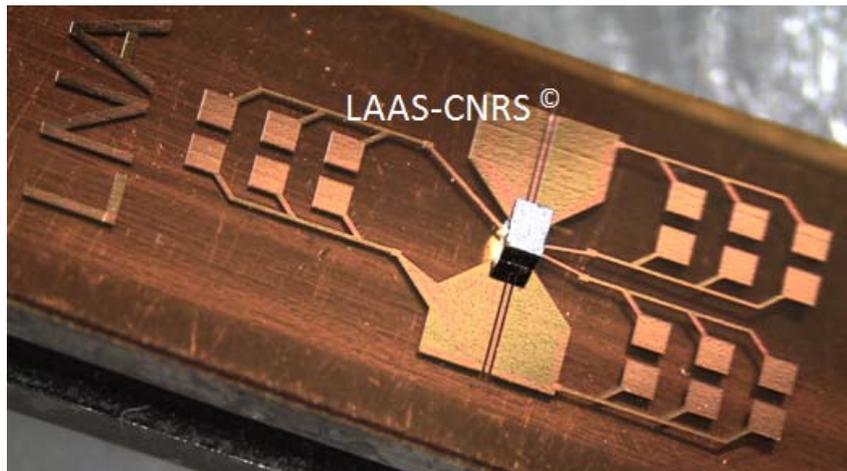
First assembly tests (LNA Dummy on Kapton)
